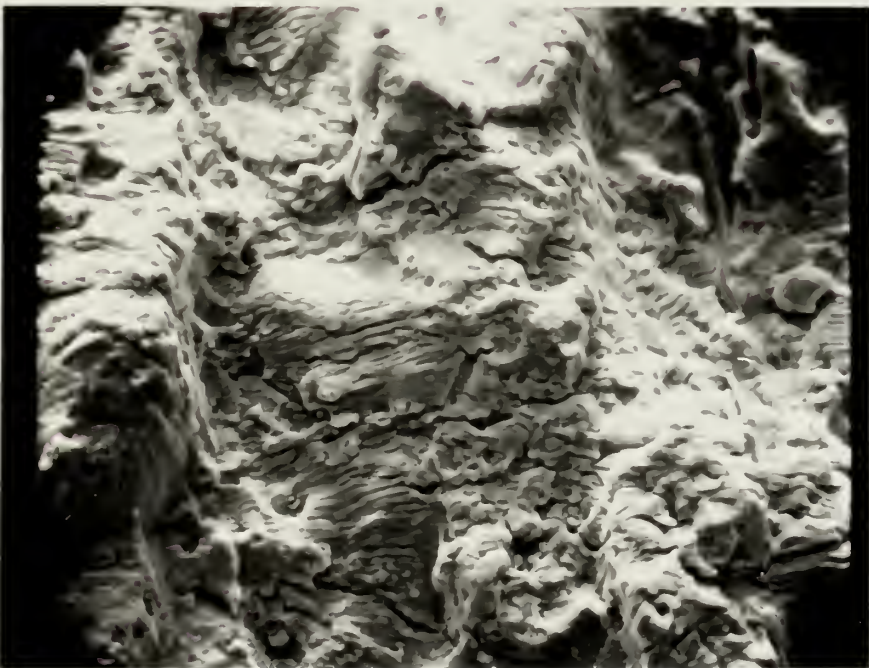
Inconel 625 plate fatigue fracture surface. 1250X.
